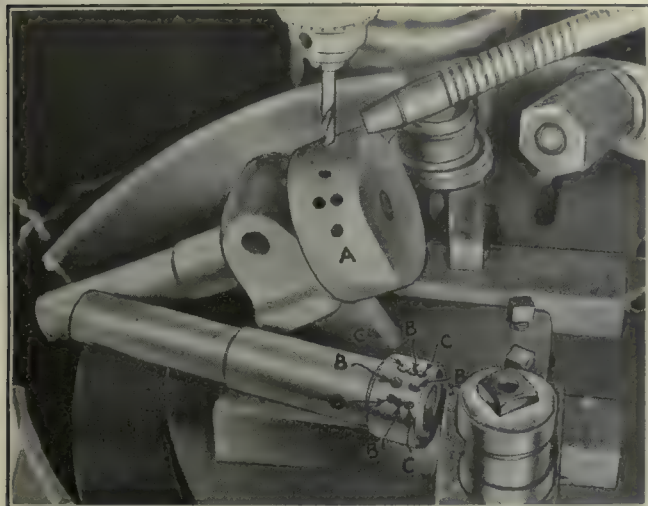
JIG FOR DRILLING PORT HOLES IN LIVE-AIR HANDLE
